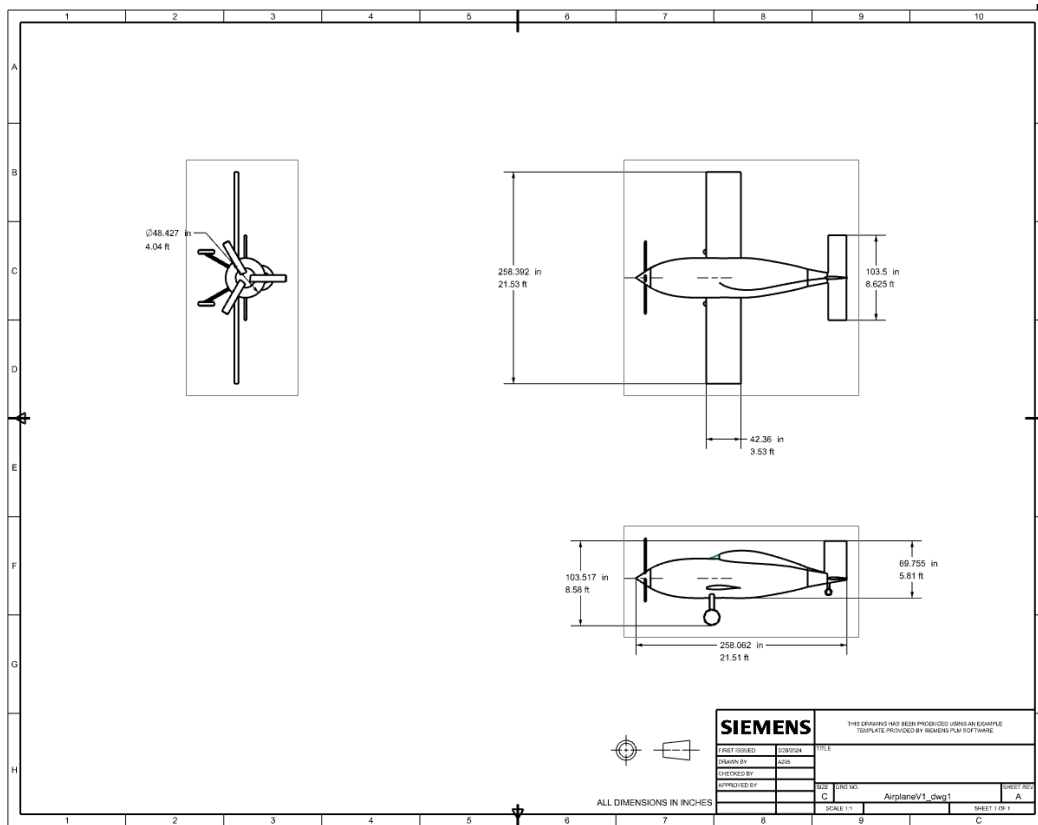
Drawing with Dimensions of the Aircraft Design
